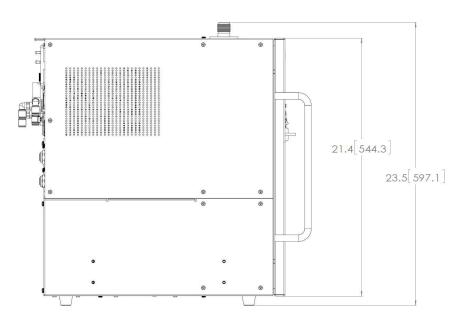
Model 5028*i* Side View—inches [millimeters]
